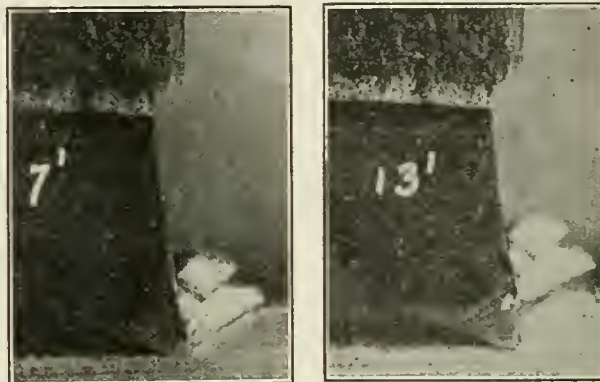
TWO OF A SERIES OF FIFTEEN PHOTOGRAPHS OF A CUT TAKEN BY A TOOL HAVING A RAKE ANGLE OF 20 DEG.
